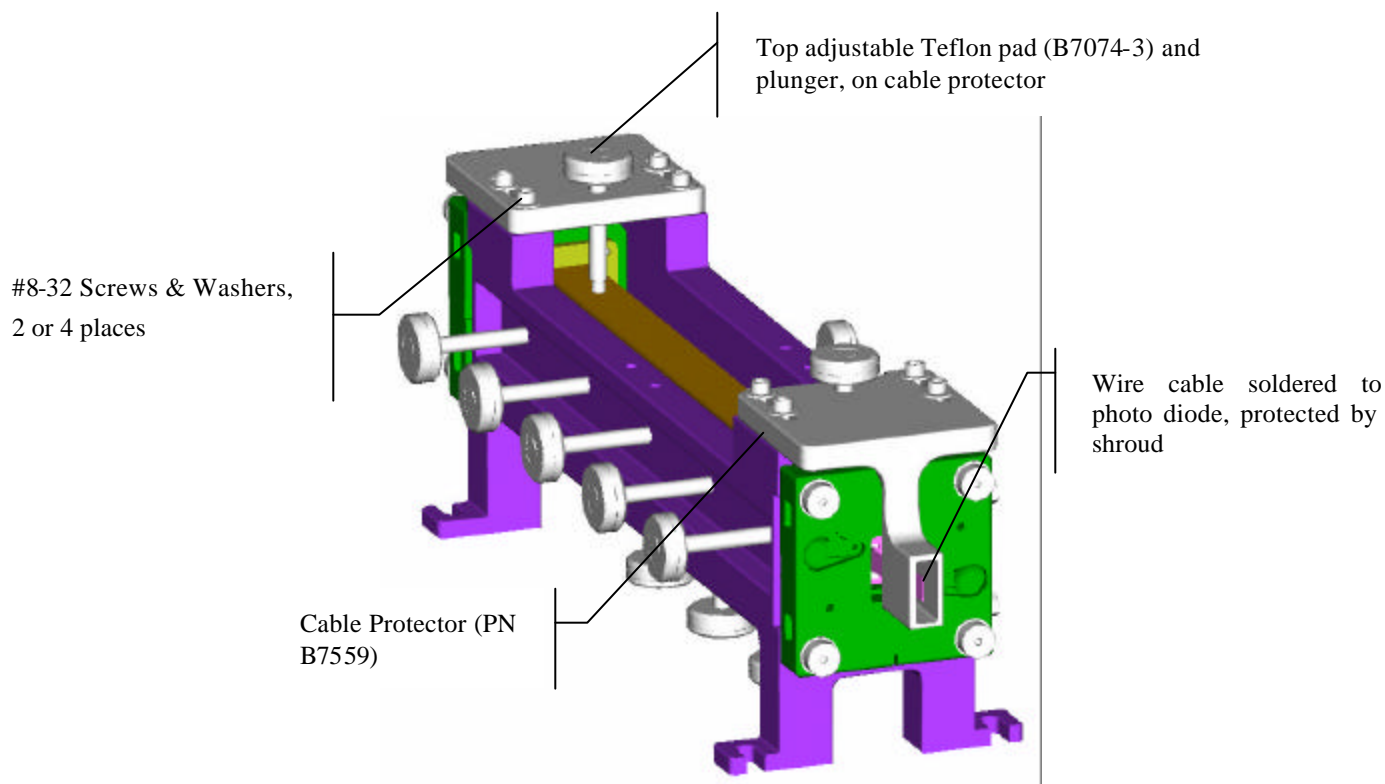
PN-B7340 Bond Set-up Assembly with Cable Protector; Bond End Shown
